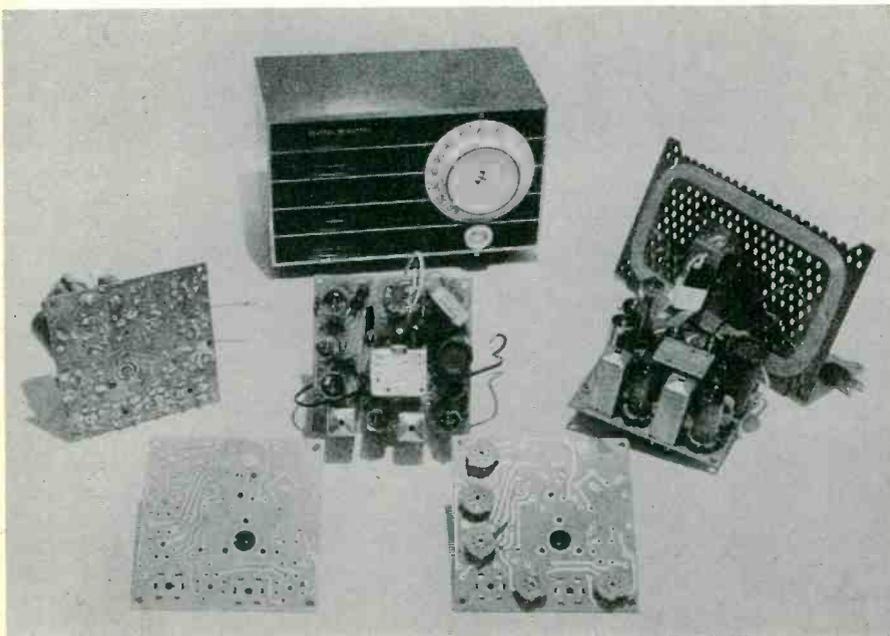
Modular type construction uses regular components mounted on a printed board.
